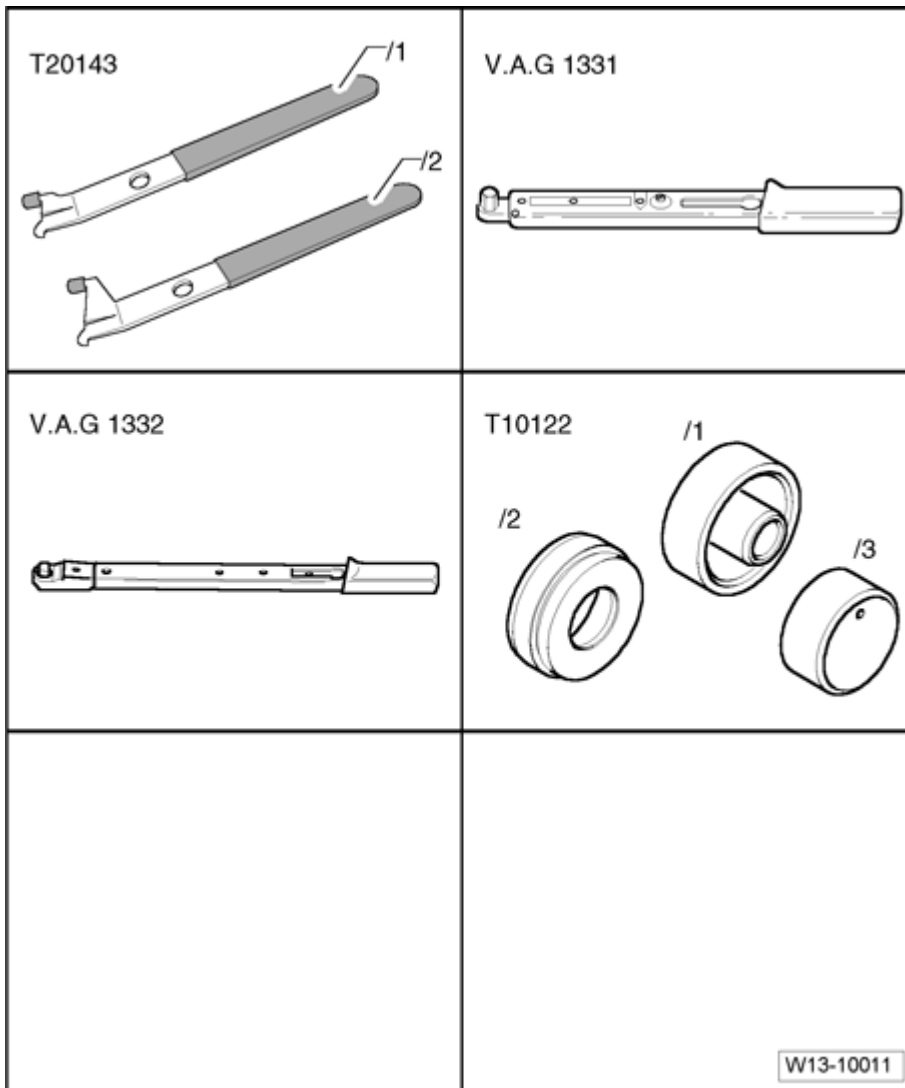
Identifying Special Tools - Crankshaft Seal, Drive Plate Side, Removing And Installing
